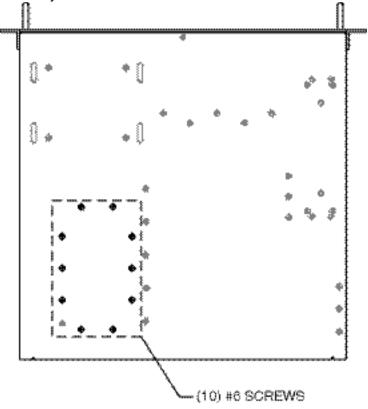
Battery Bracket Assembly Location on Bottom Chassis
